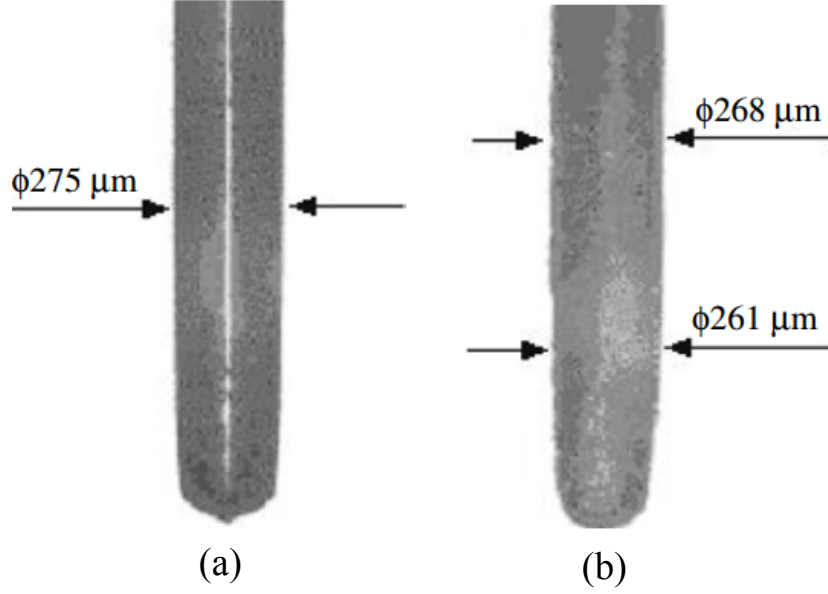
Shape of tool electrode after machining (a) without magnetic field and (b) with magnetic field [17].
